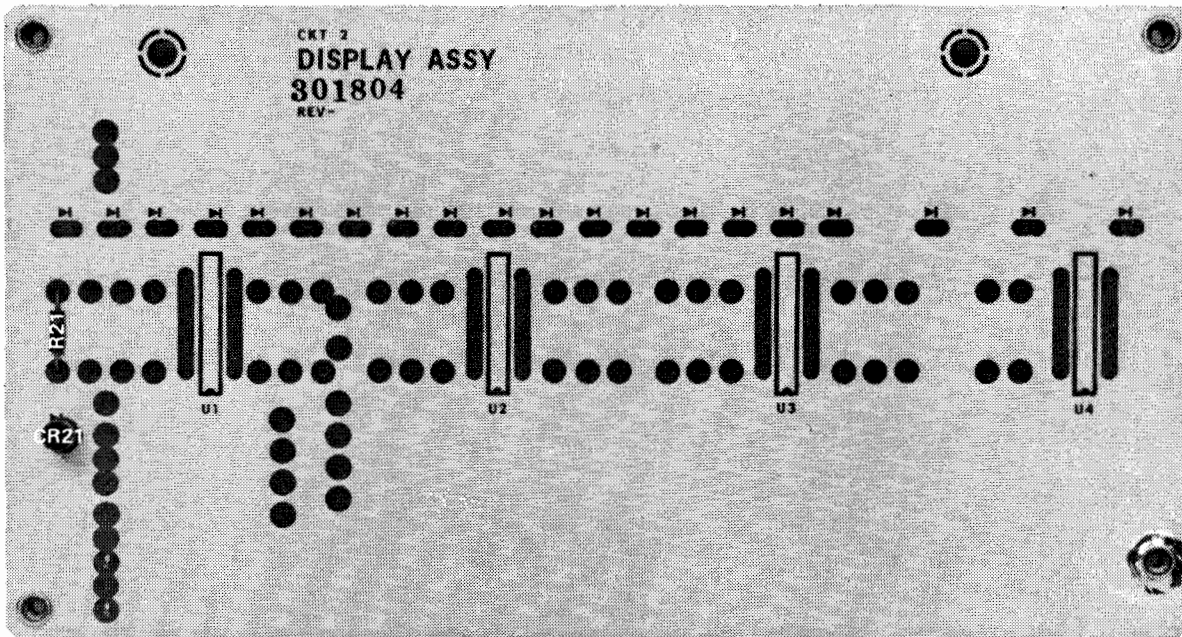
NO DISPLAY PCB ASSEMBLY (-05 BLANK FRONT PANEL OPTION)
